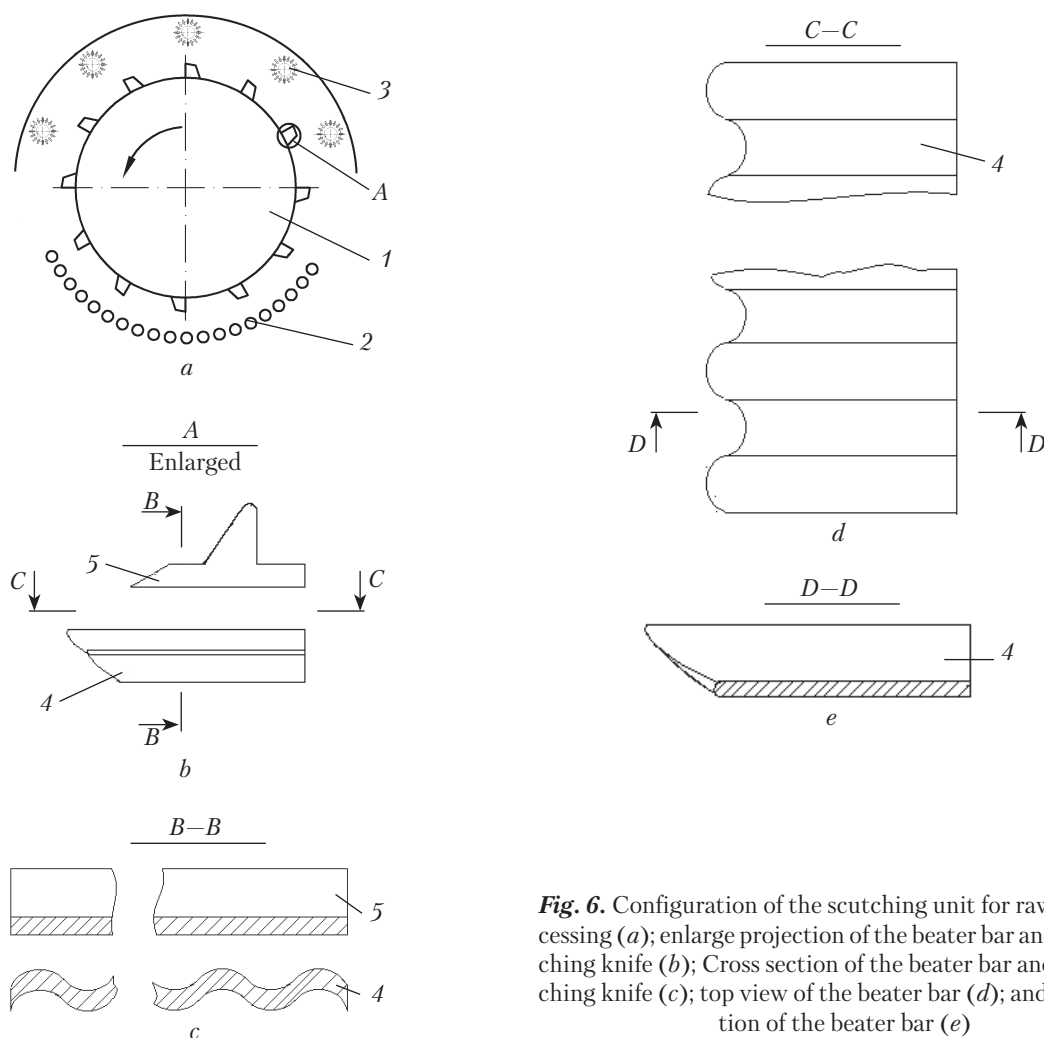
Configuration of the scutching unit for raw bast processing (a); enlarge projection of the beater bar and the scutching knife (b); Cross section of the beater bar and the scutching knife (c); top view of the beater bar (d); and cross section of the beater bar (e)
